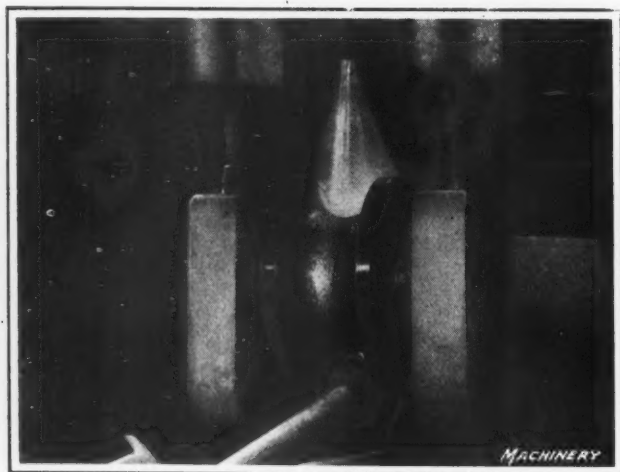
Lap-welding Rolls, showing Mandrel in Position
